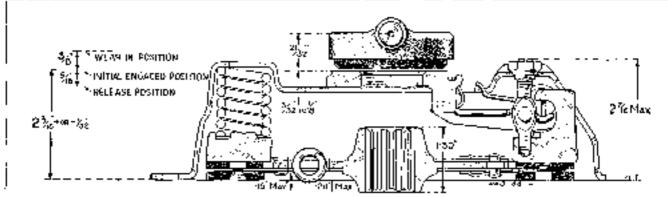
A sectional diagram of the clutch unit showing the main dimensions for assembly.
